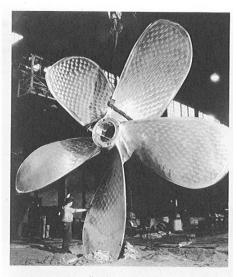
Propeller for a 114 000 ton tanker measures 7.5 m (24.7 ft) in diameter and weighs 37.52 Mg (82 725 lb). Part was machined and polished from a single 53.75 Mg (118 500 lb) nickelaluminum bronze casting. Courtesy of Baldwin-Lima-Hamilton Corporation
